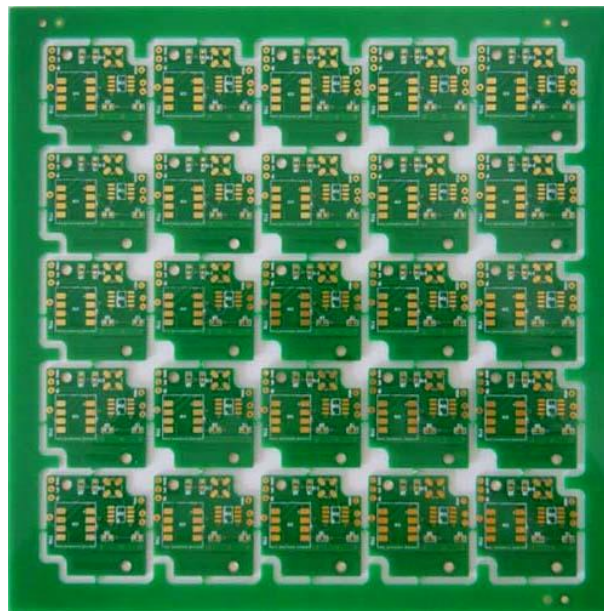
A panel with 25 PCBs (Pcbfabrication.com, 2014)
